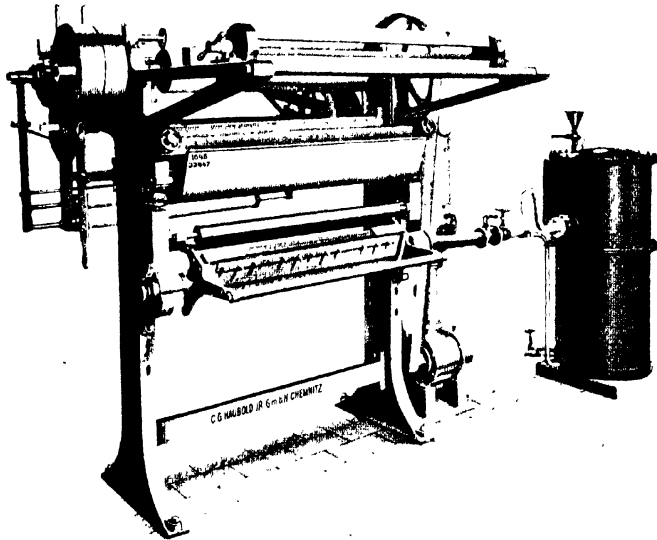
One Burner Singeing Machine with Gasoline Apparatus.
